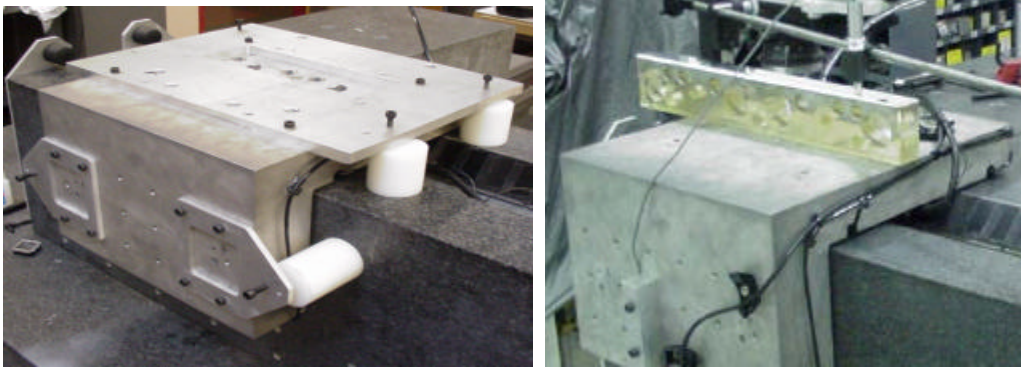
Prototype system with bearings being replicated in-place, and during metrology tests
